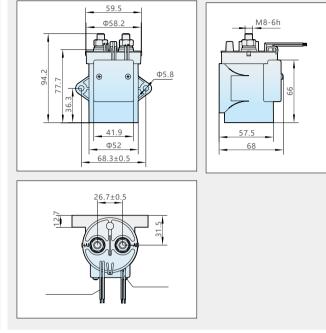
Outline drawings and installation dimension diagrams of NCZ2-300、350 (P)/E/ Fig 34 Outline drawings and installation dimension diagrams of NCZ2-300、350 (P)/E/ H
